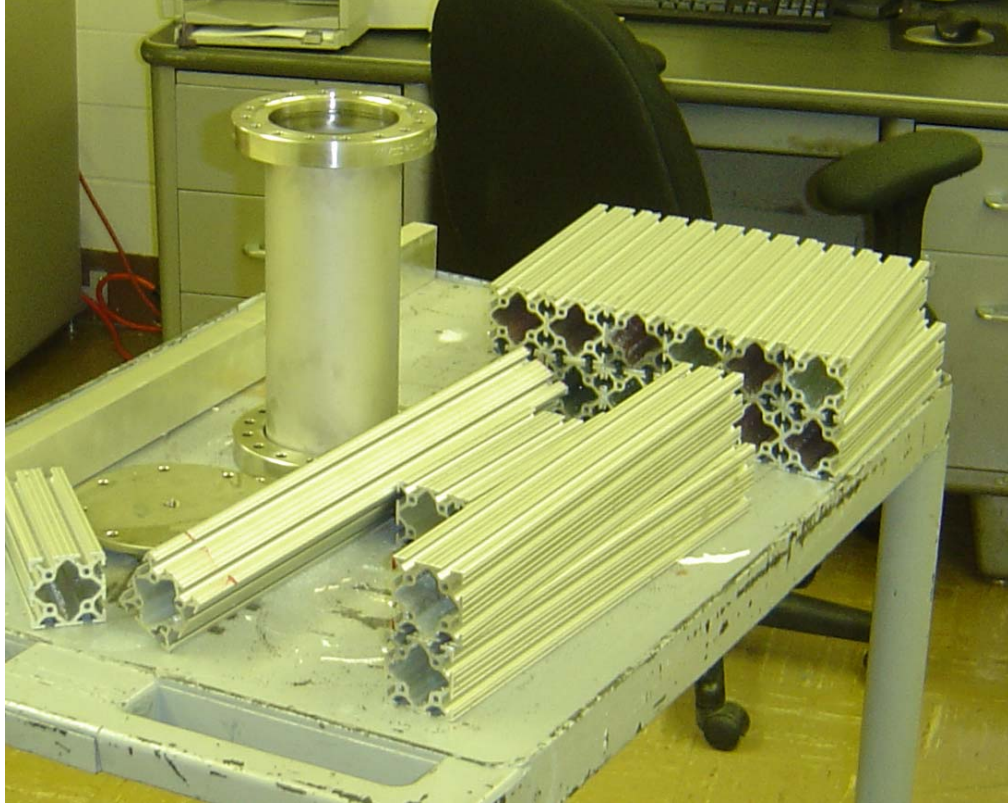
80/20 Pre-cut Rails for Construction of the Spray Chamber Frame and Miscellaneous Parts
